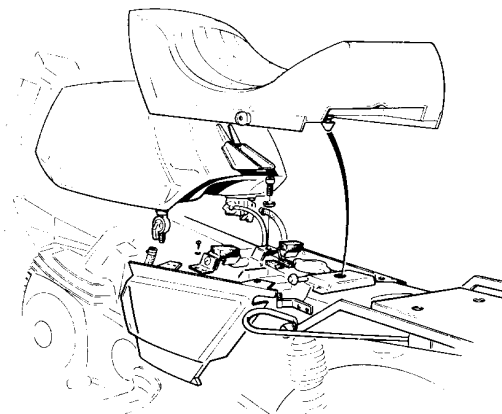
Removing and Replacing the Fuel Tank and Side Covers
